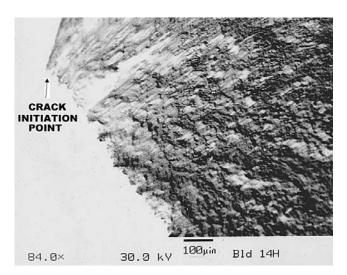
One of the Crack Locations of Case B Cutback Impeller Showing No Preexisting Defects.
